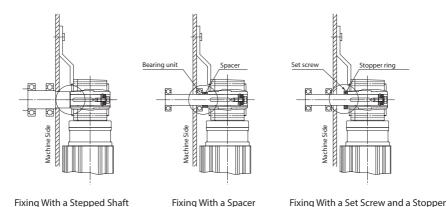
Method of Fixing So That the Product Does Not Move to the Machine Side
